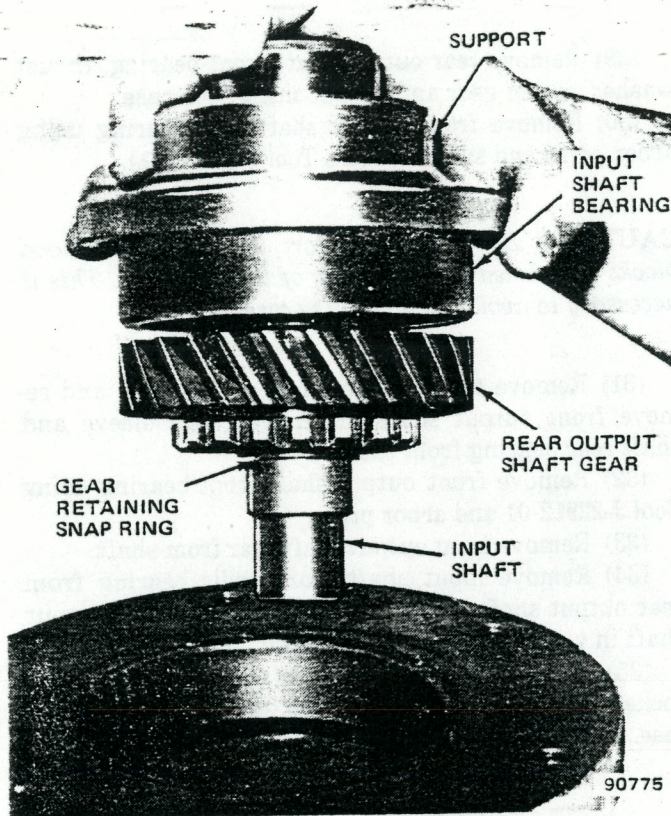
D-77 Front Support, Input Shaft and Rear Output Shaft
